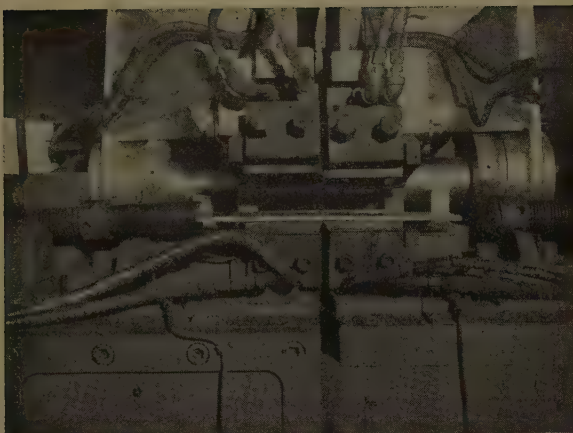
(left). Pinch-off dies in flash - welding machine
